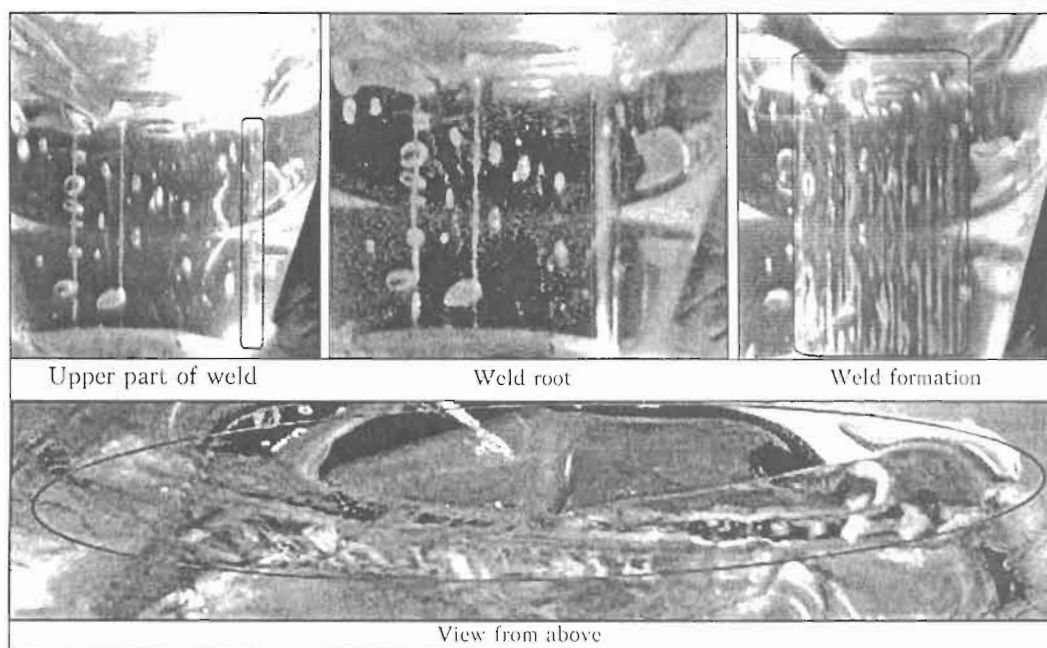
Hydrogel workpieces welded using CO_2 -laser at $P = 1 \text{ kW}$ and $v_w = 100 \text{ m/min}$
